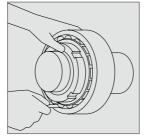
Checking bearing clearance with bearing mounted on shaft.
